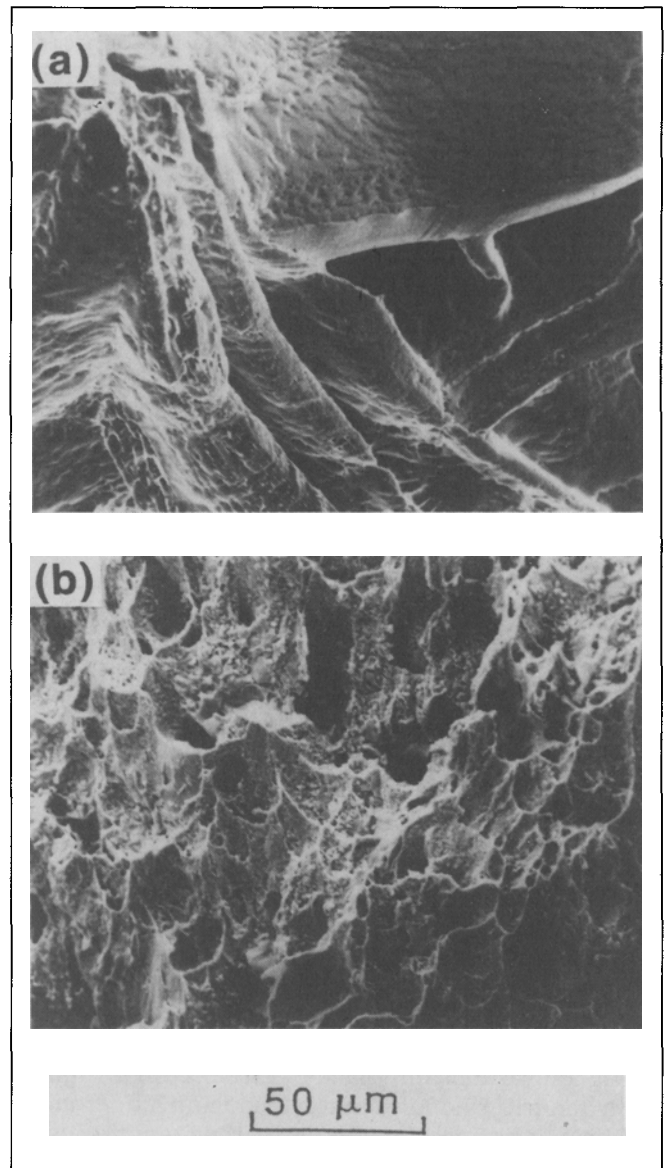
Fracture surfaces of the (a) Sn-8Zn-5In and (b) Sn-8Zn-5In-0.1Ag solder alloys. The Ag-free alloy displays undesirable plate-like fracture features and the Ag-containing alloy displays the more desirable ductile dimples on the fracture surface.
